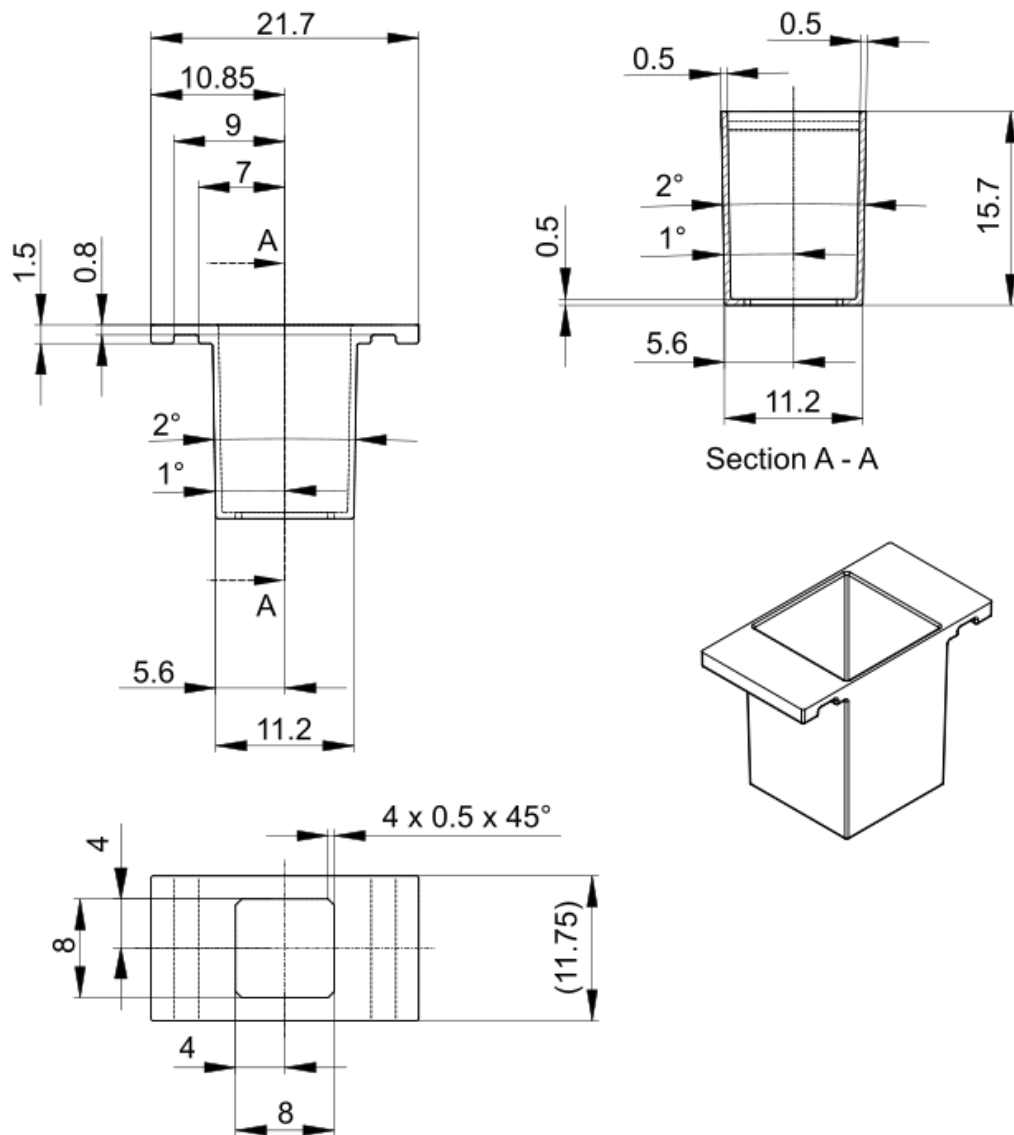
Construction drawing of the lower part of the sample holder. The dimensions are displayed in mm. Unspecified radii have a size of 0.2 mm.[127]
